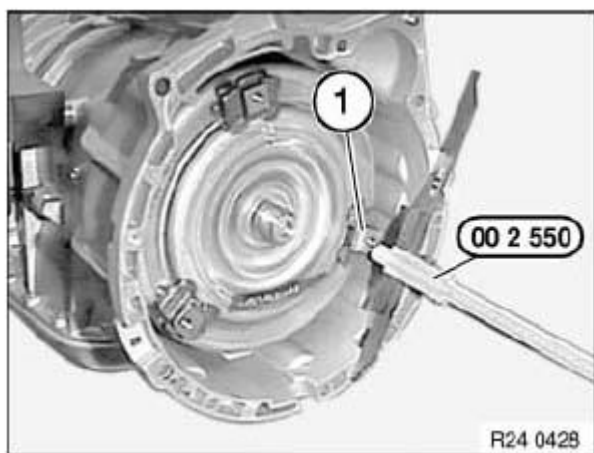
Checking Distance Between Contact Surface And Tapped Hole Surface In Torque Converter With Special Tool 00 2 550
